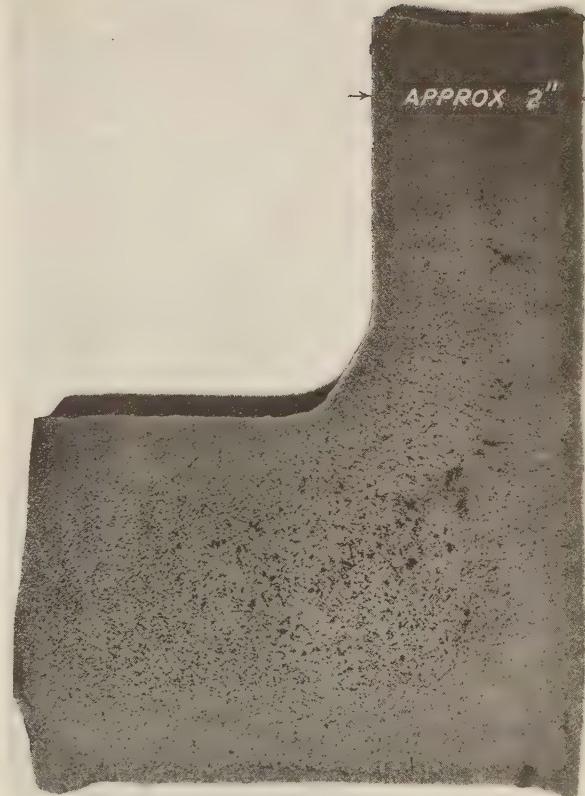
MACROSECTION FROM THE DRAG SIDE OF BONNET FLANGE
